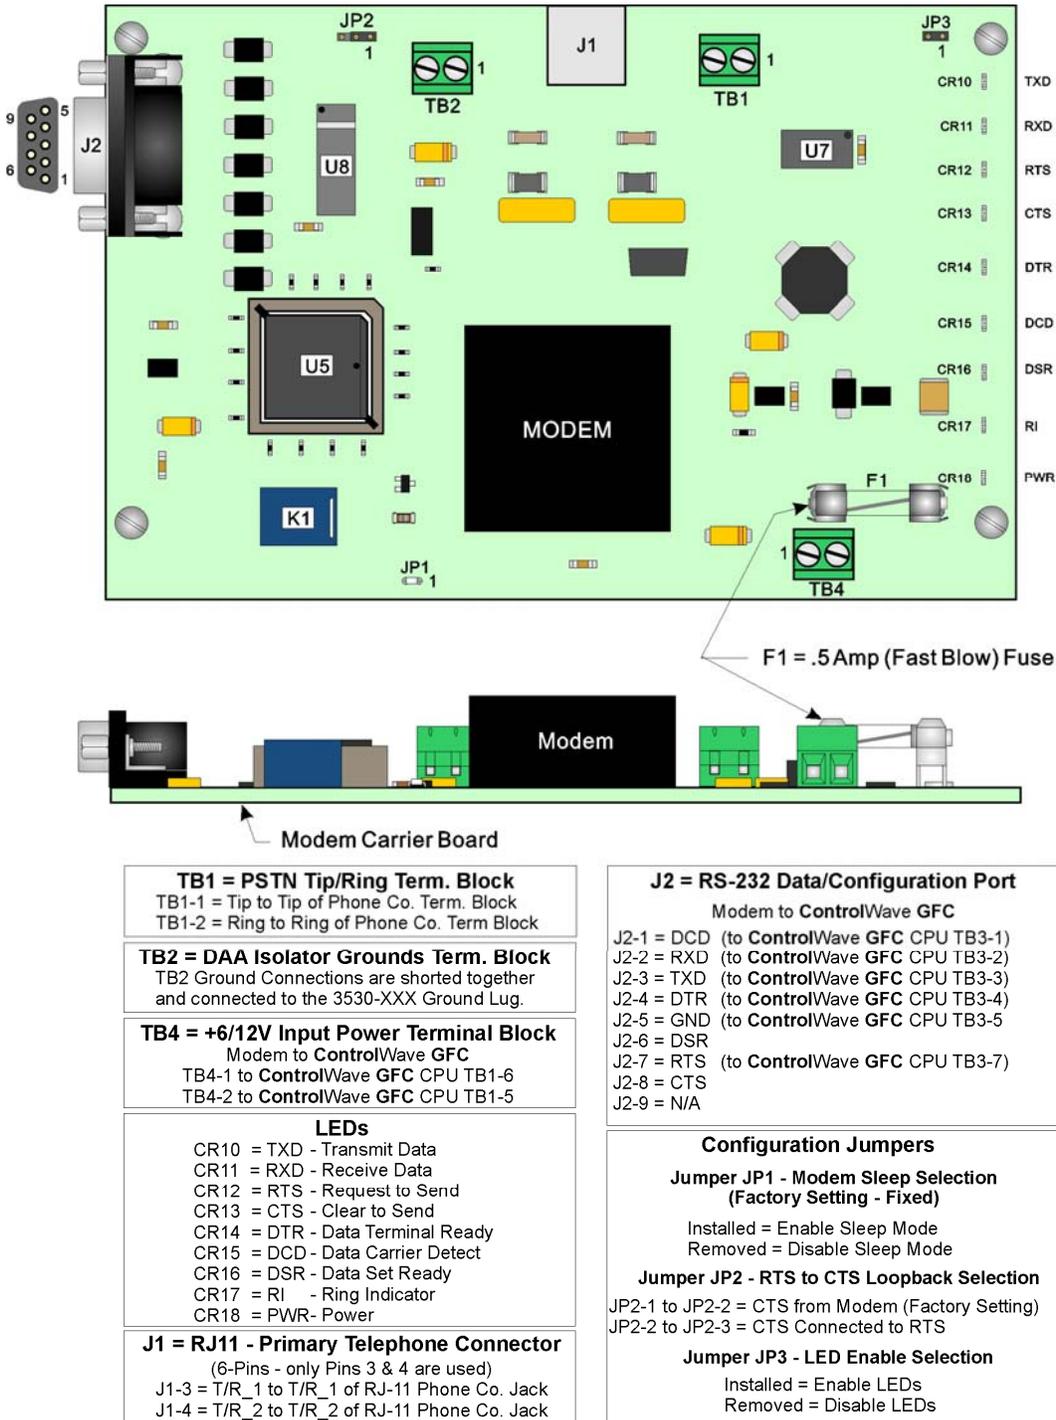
9600 PSTN Modem Assembly - P/N 400000-01-6
